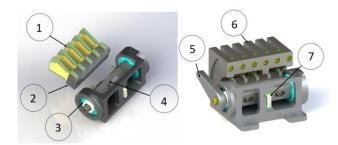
Structure of the actuator with pie-shaped stacked PCB coils
